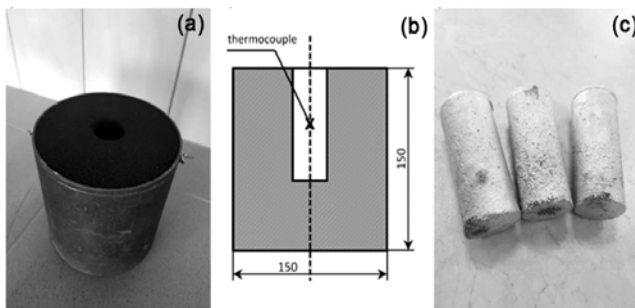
Casting process in green sand molds: (a) Sand mold before pouring, (b) Mold scheme and (c) Ready castings after shakeout.
